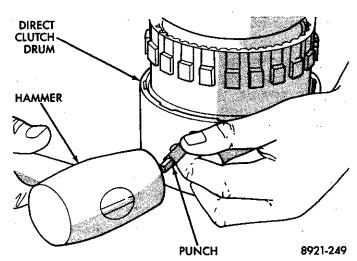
Marking Direct Clutch Drum And Annulus For Assembly Alignment
